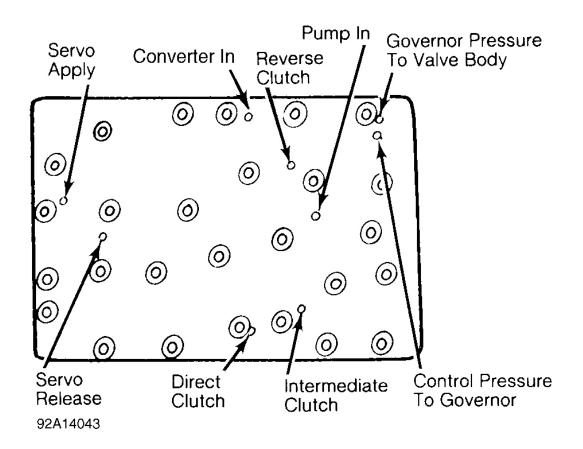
Identifying Air Pressure Test Apply Ports on Adapter Plate Courtesy of FORD MOTOR CO.
